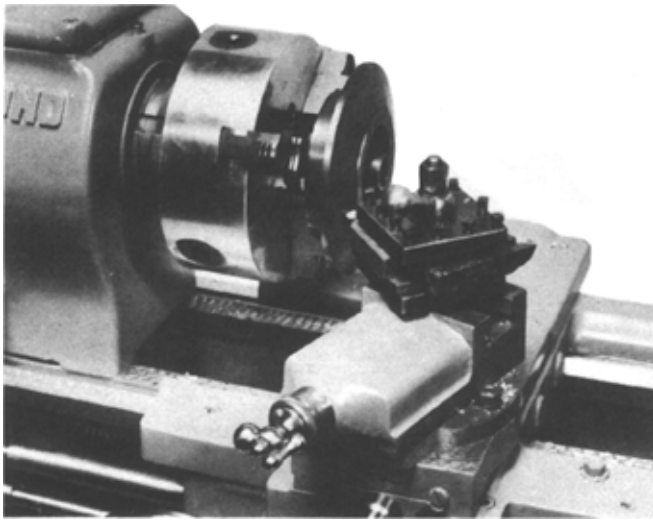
3-JAW CHUCK USED FOR HOLDING FACING JOB.
